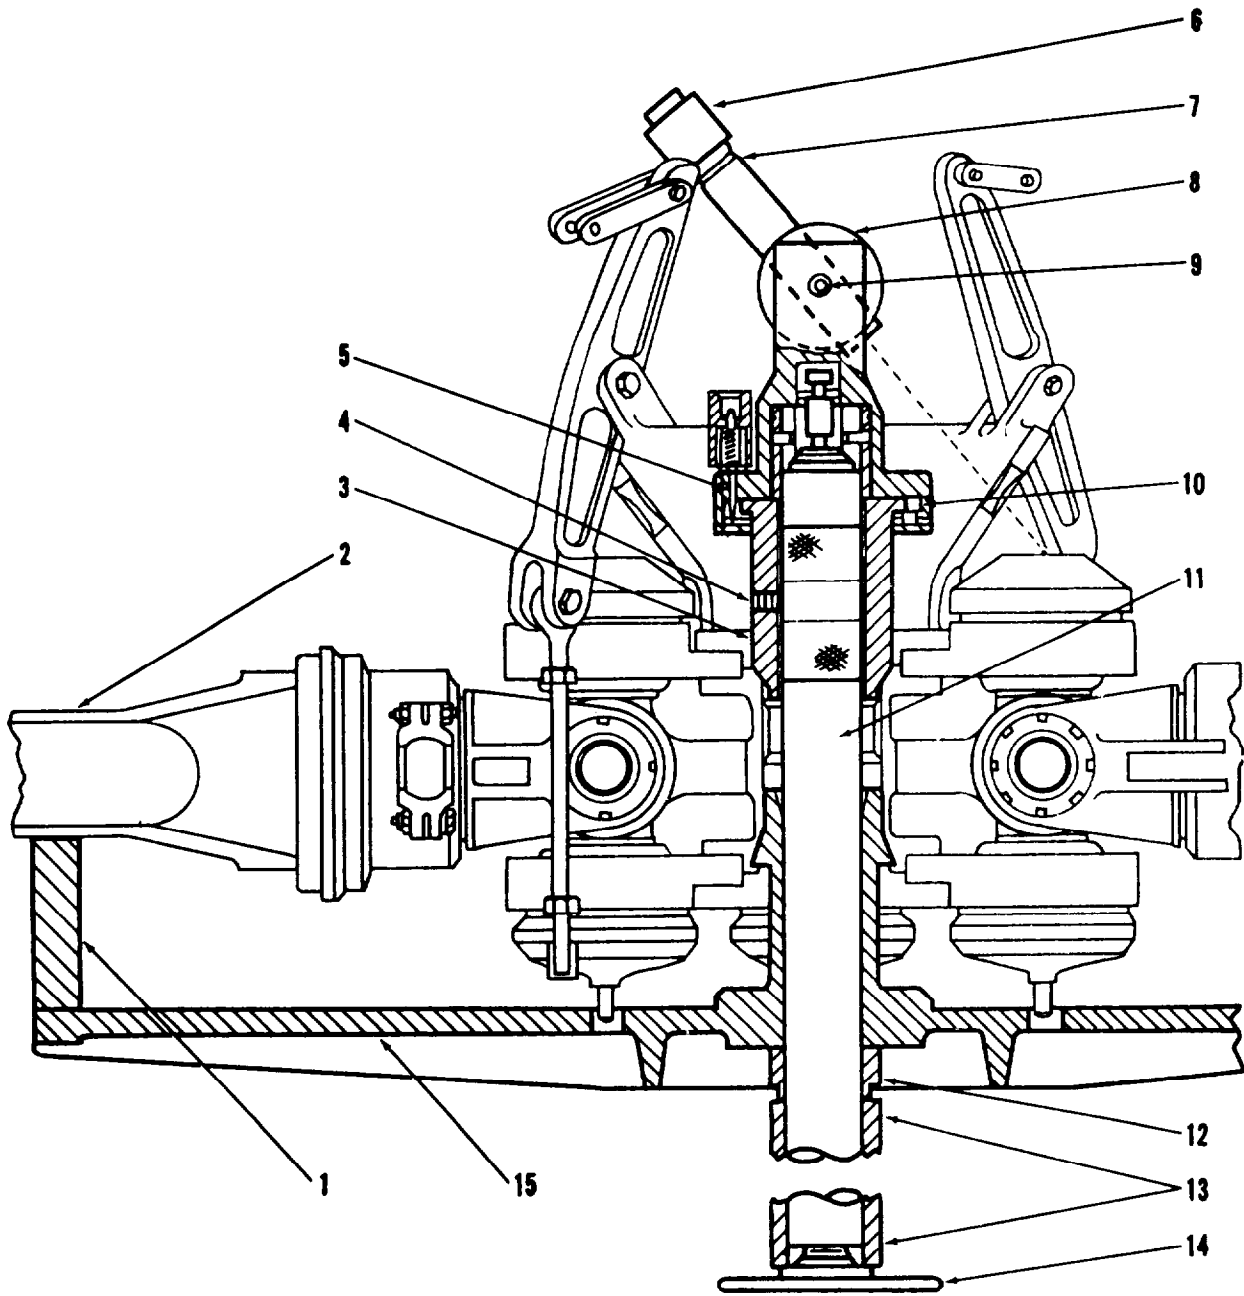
Setup for Optical Trammeling of CH-37 Helicopter Tail Rotor Assembly (Sheet 1 of 2).
